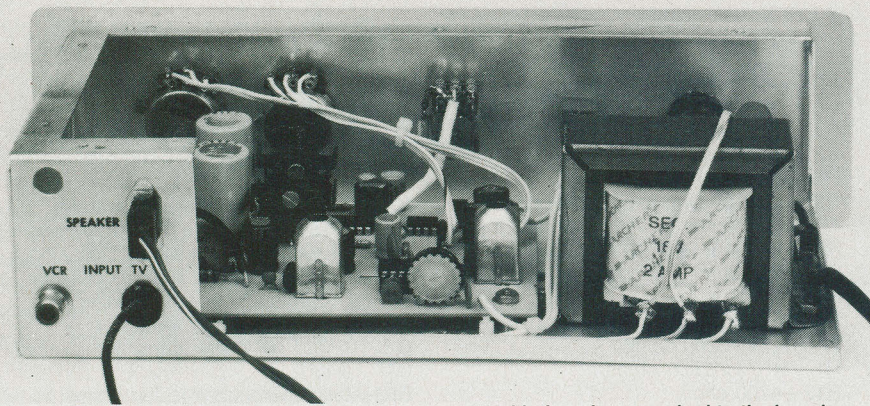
THE OFF-BOARD components should be mounted before they are wired to the board.
